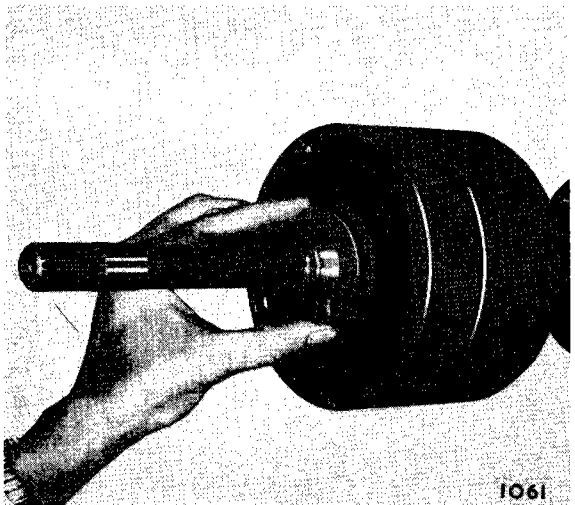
Placing the thrust washer in position on the input shaft
